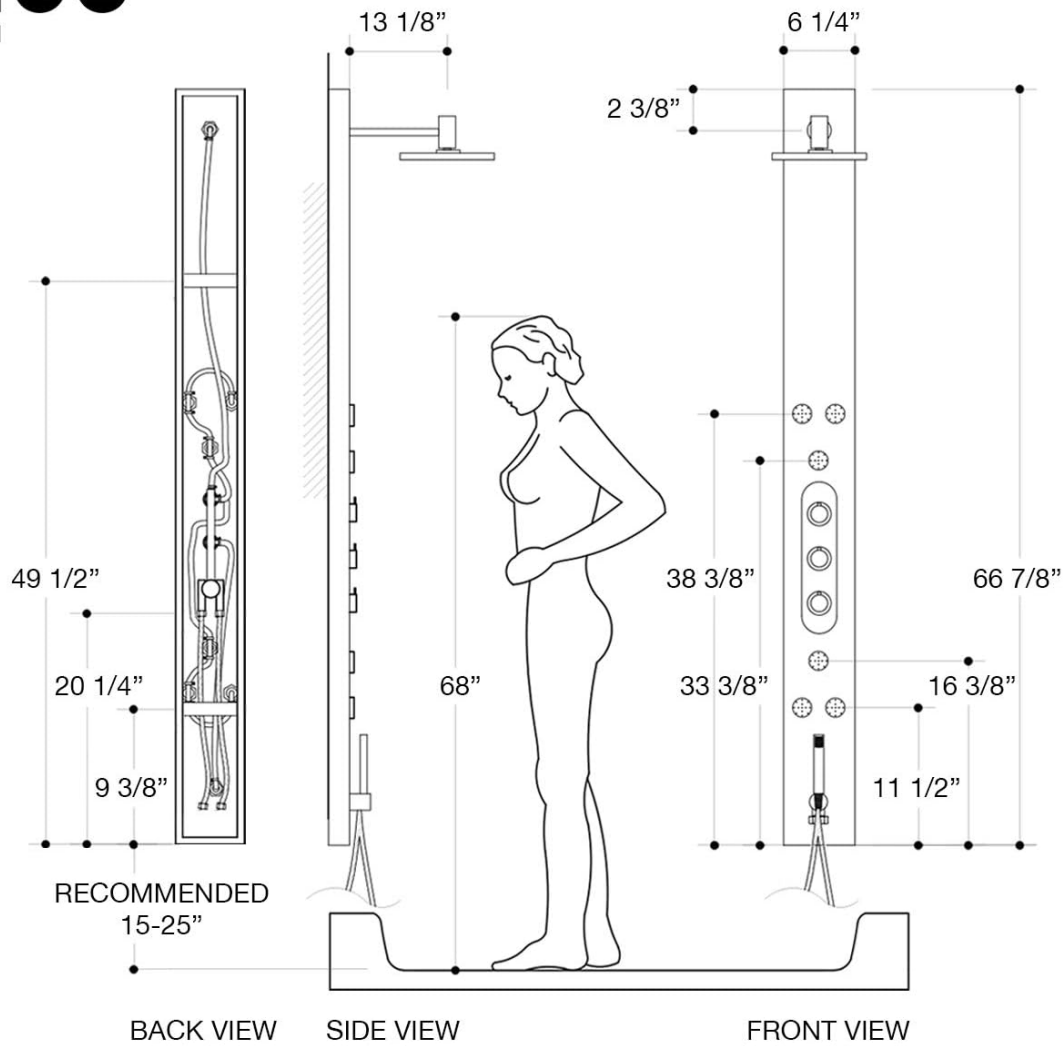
Technical diagram illustrating the dimensions and recommended installation height for the VIGO Dilana Shower Panel System.
